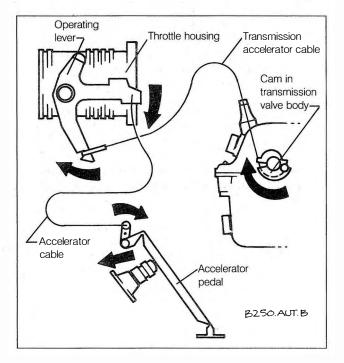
Accelerator cable and transmission accelerator cable layout. Arrows show movement of operating lever and transmission cable when accelerator pedal is depressed.
